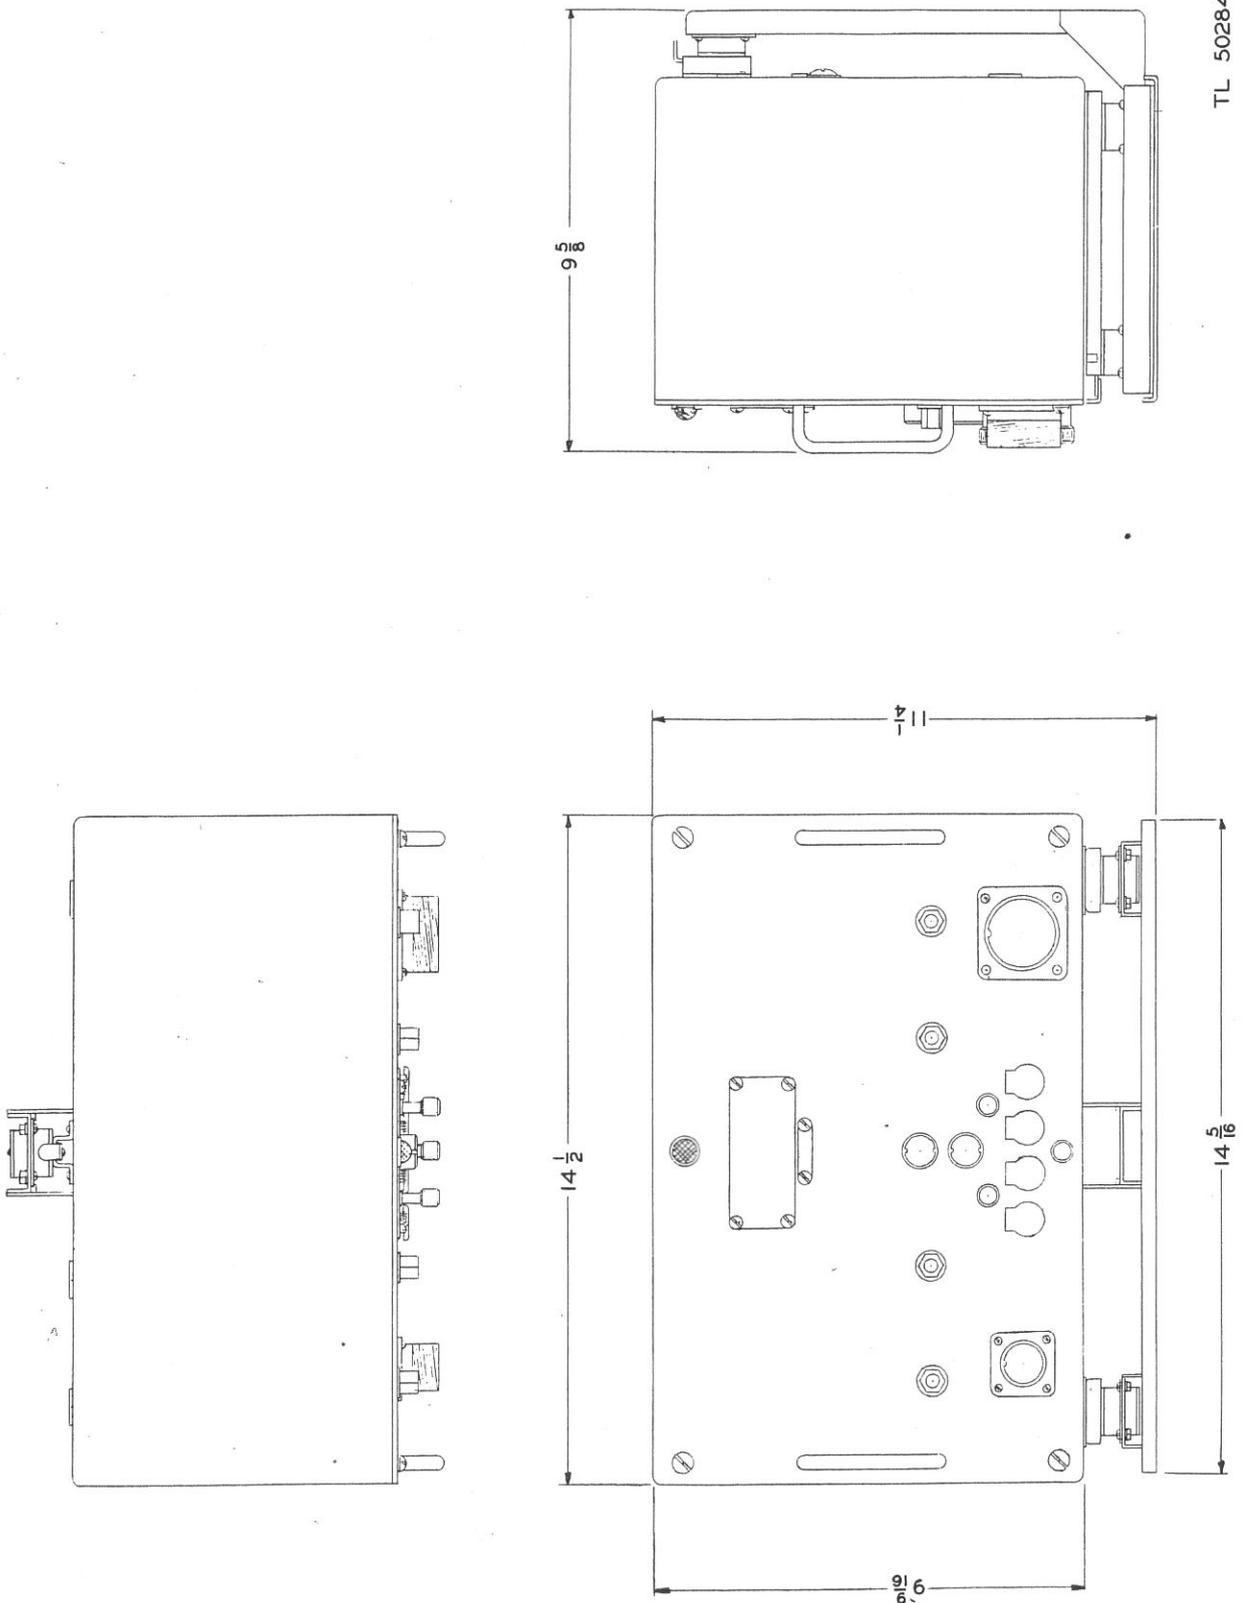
Amplifier BC-908-B and Mounting FT-318-B, outline drawing
